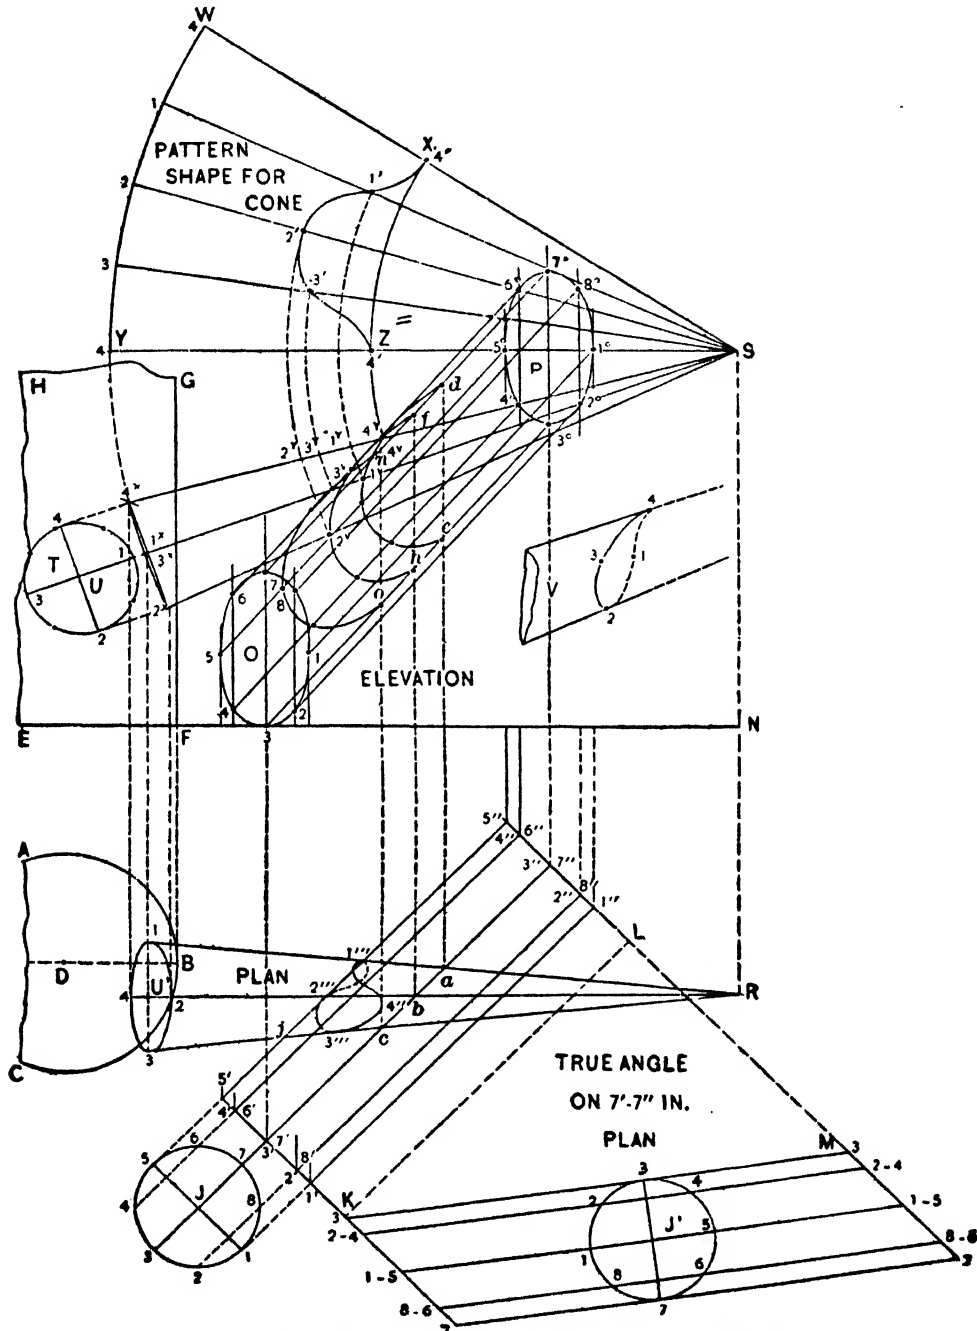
Plan, Elevation, True Angle, Sections and Pattern
